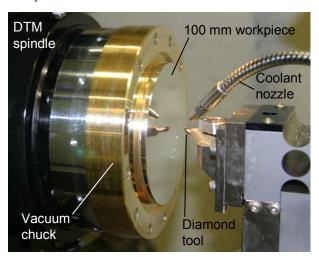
Diamond turning of a 100 mm diameter aluminum workpiece on a custom vacuum chuck
